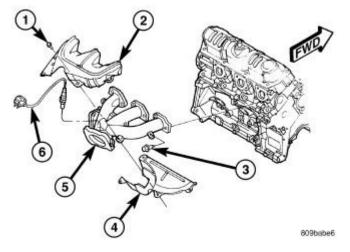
EXHAUST MANIFOLD - RIGHT Courtesy of CHRYSLER LLC
